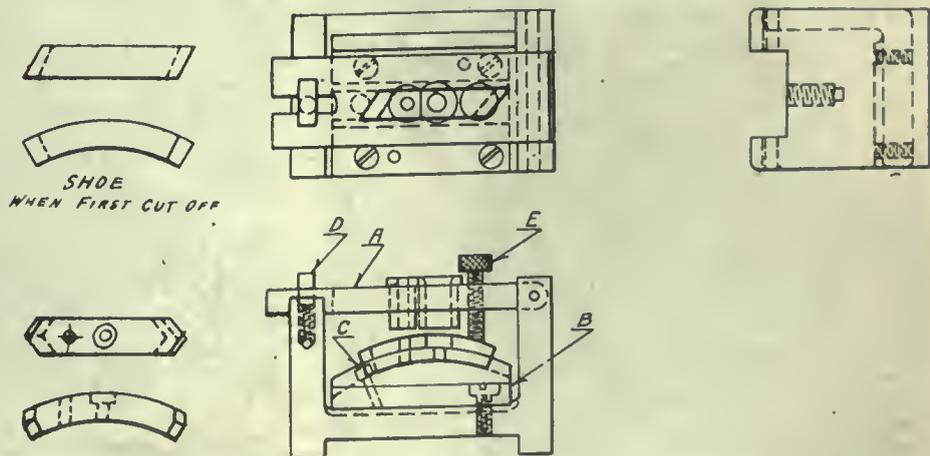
THE JIG FOR DRILLING OF TWO HOLES.
